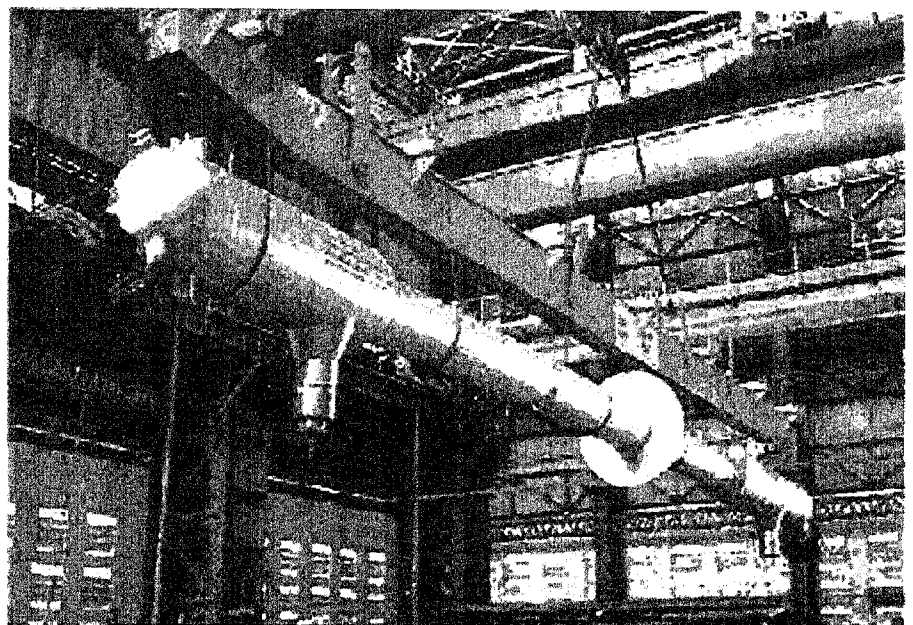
Photograph showing the Evaporator in BHEL workshop. The evaporator has now been transported to IGCAR.
